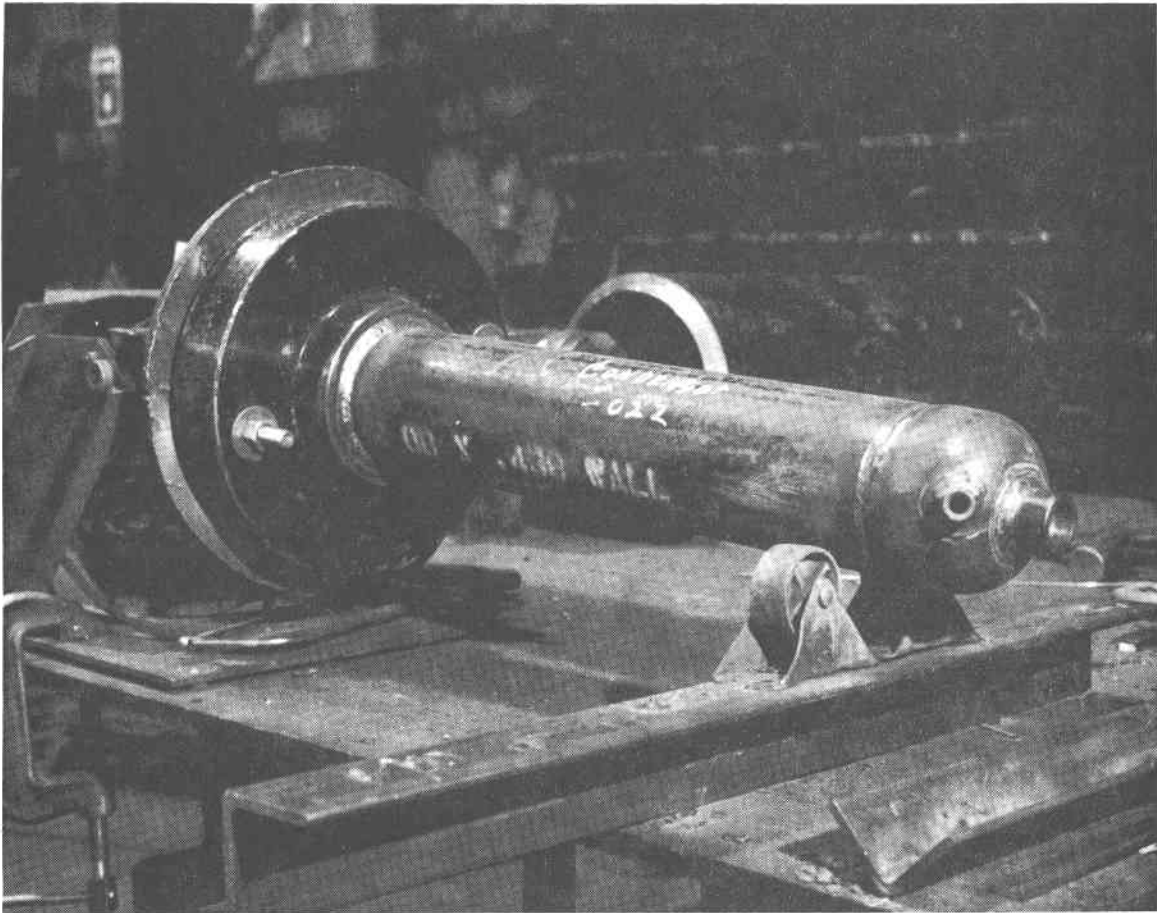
Condenser Unit in Welding Fixture
